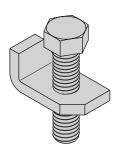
B Rod Stiffener with Break-Off Bolt Head
